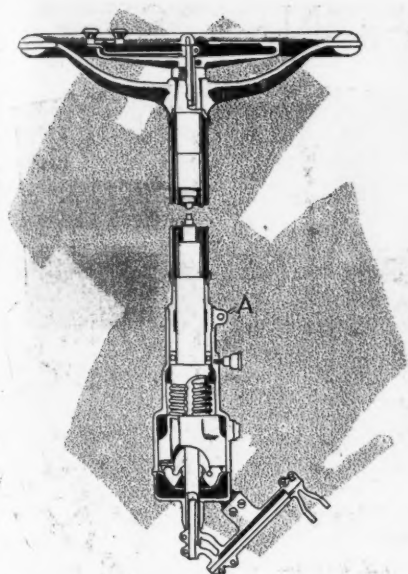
MEANS OF ADJUSTING KNOX POST BY NUT A
